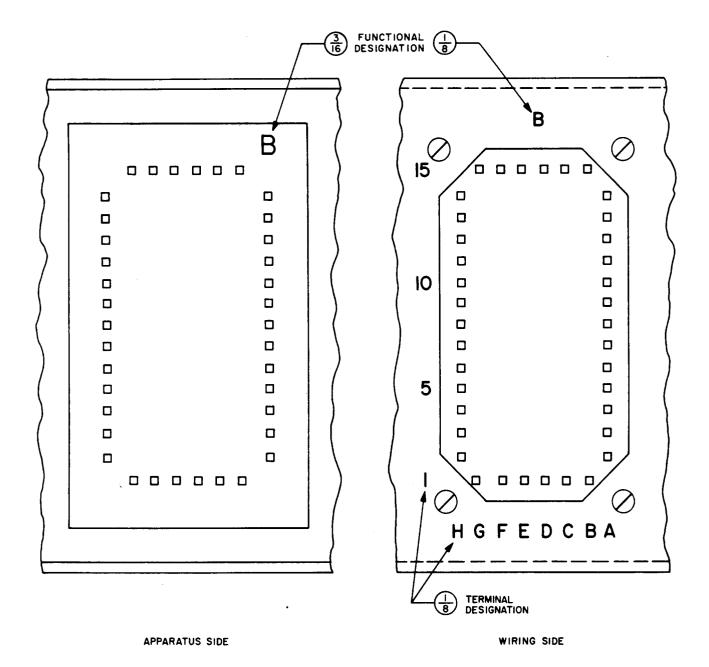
Terminal Strips—278 Type for Mounting Pigtail Components
